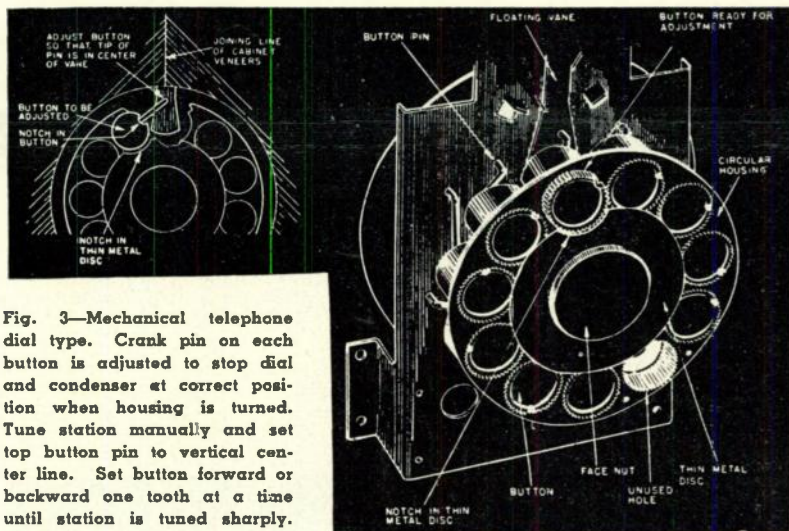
Mechanical telephone dial type. Crank pin on each button is adjusted to stop dial and condenser at correct position when housing is turned. Tune station manually and set top button pin to vertical center line. Set button forward or backward one tooth at a time until station is tuned sharply.
